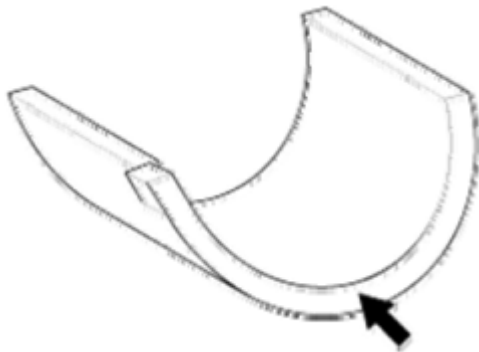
Identifying Connecting Rod (Lower) Bearing Mark
